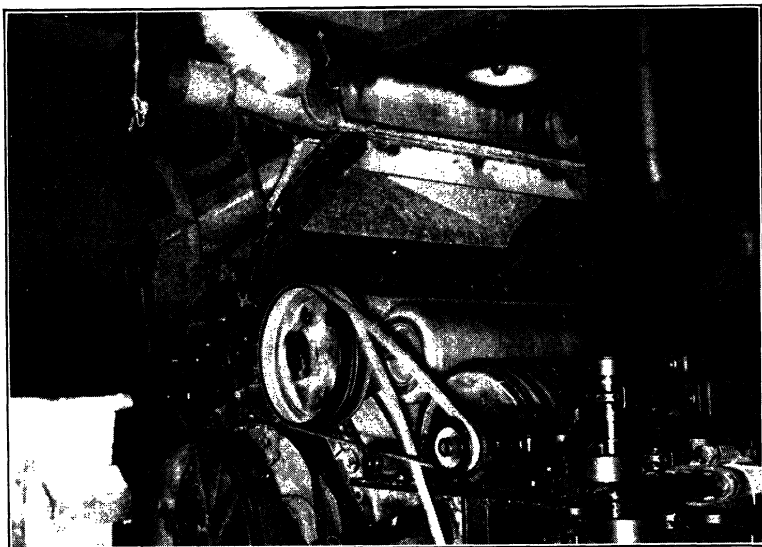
Local Exhaust Hood at a Carding Machine (*Courtesy Connecticut Department of Health*)
